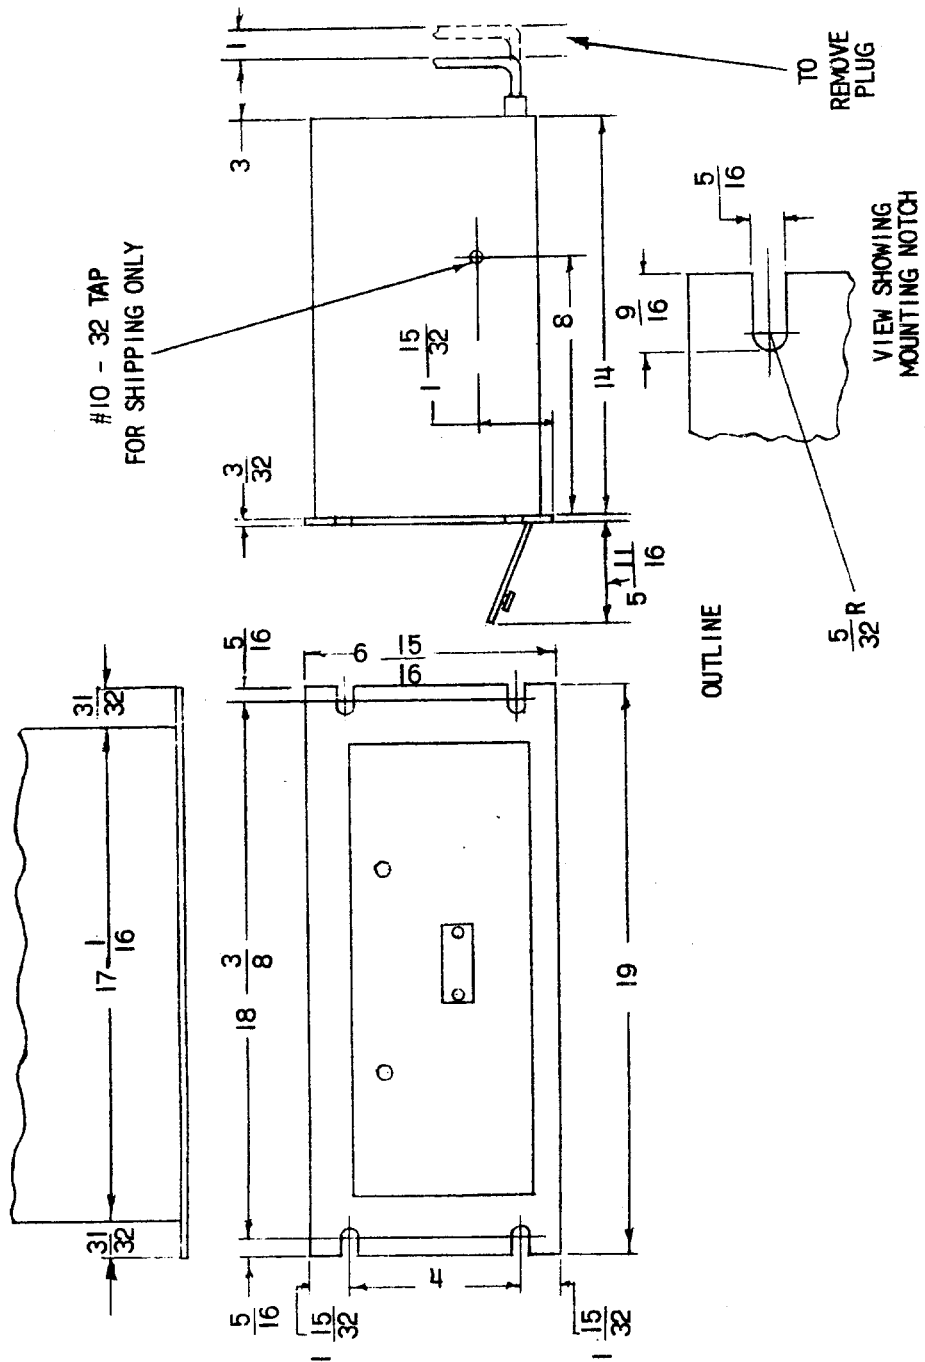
(0227A2037-0) Outline and Mounting Dimensions
